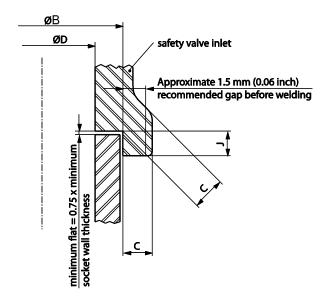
ASME B16.11 - welding gap and minimum flat dimensions for socket-welding fittings
